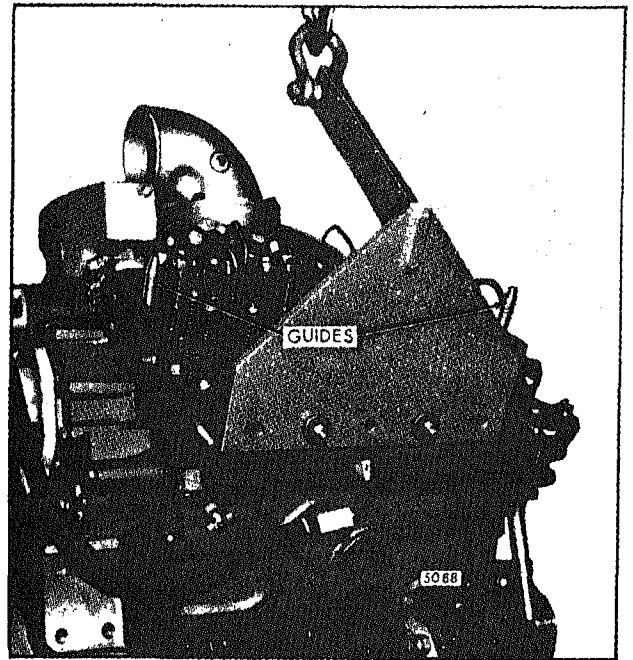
Lifting Cylinder Head Assembly Off Cylinder Block with Tool J 22062-01
